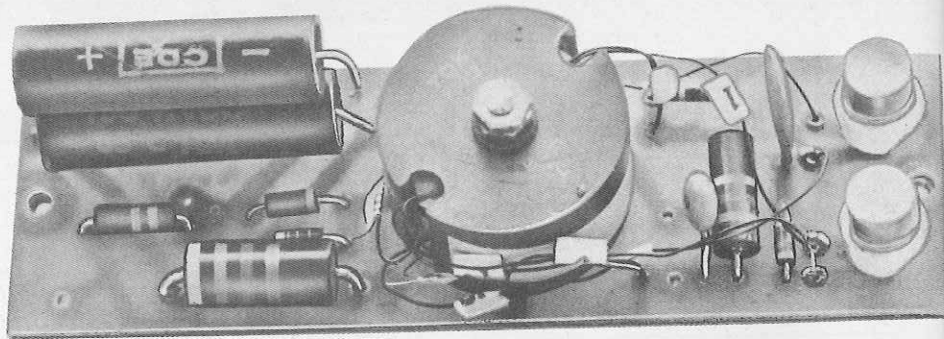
Wired pc board assembly shows T1 mounted with hardware fiber washer. C4 is on top of C3.
